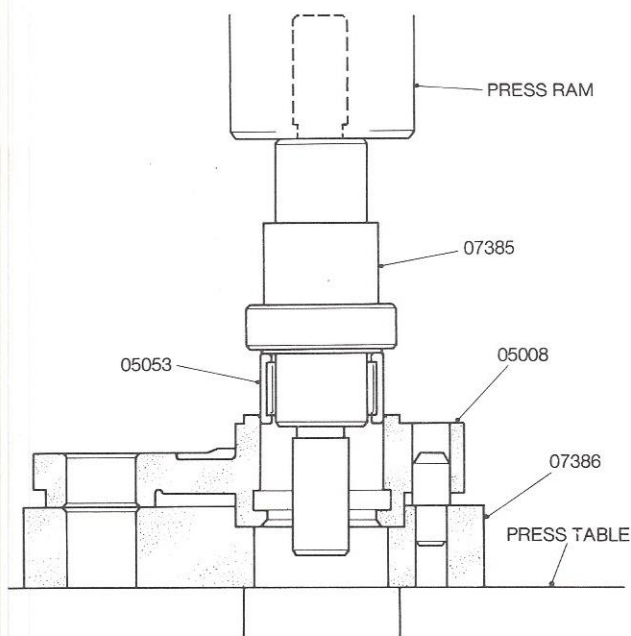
Assembly of the Layshaft Carrier Needle Roller Bearing
